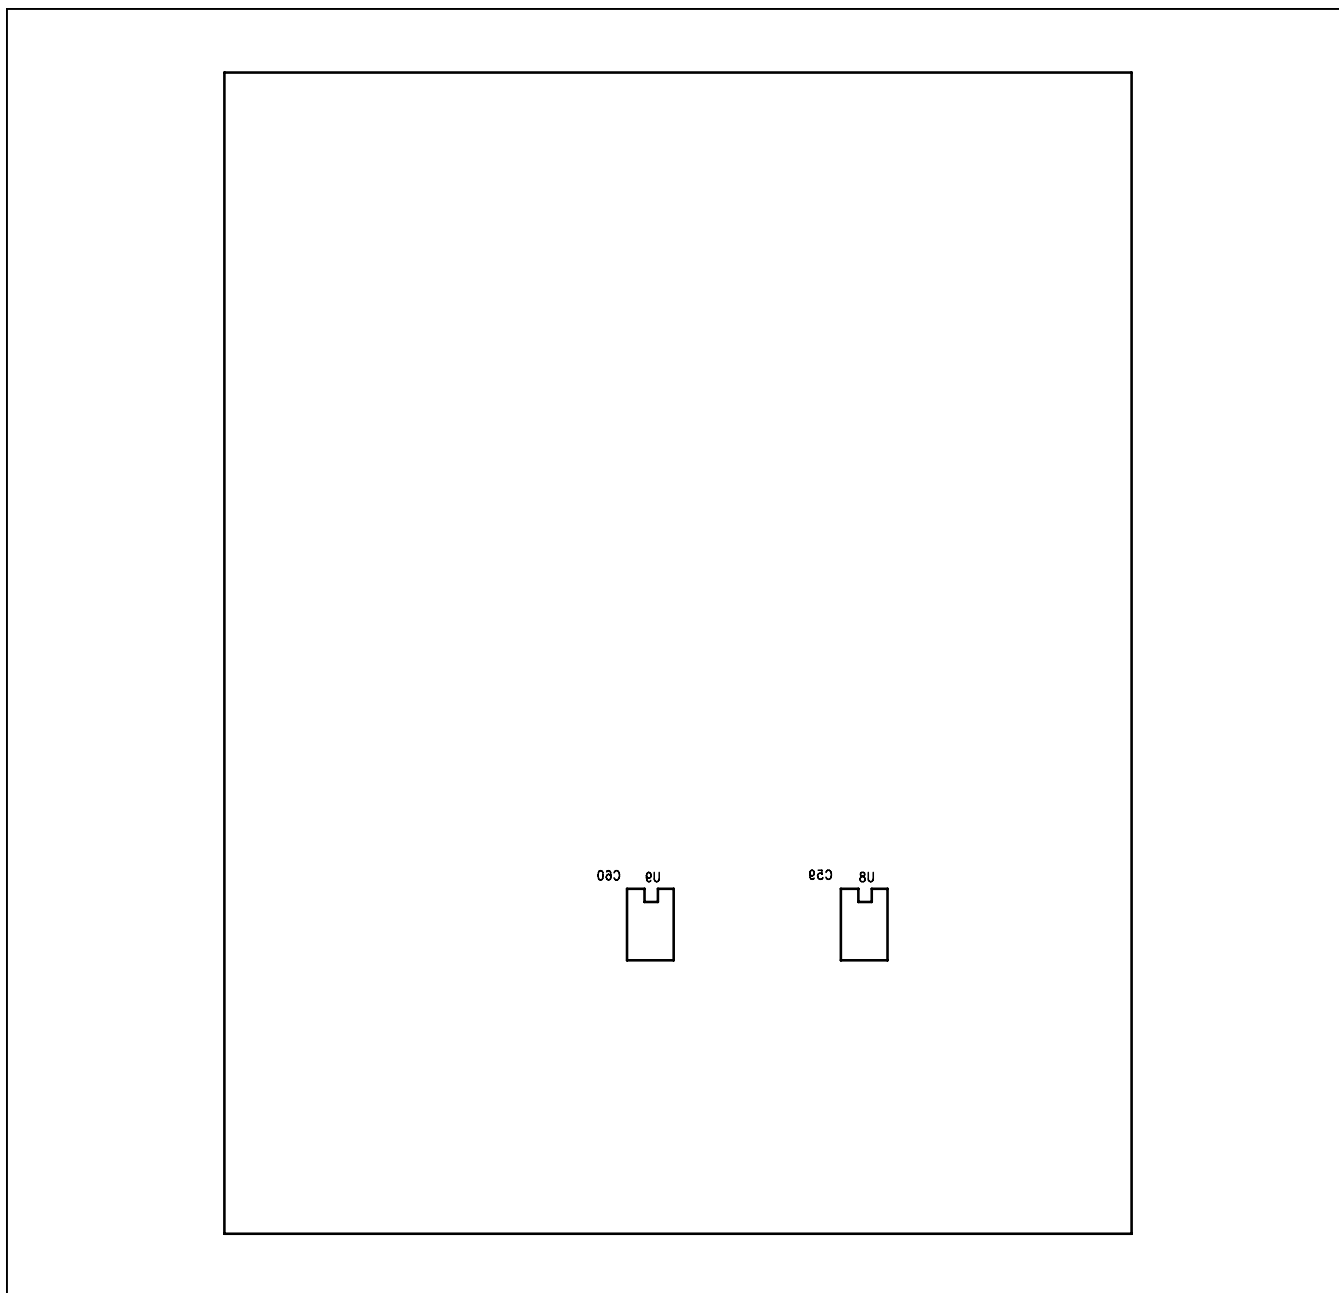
MAX2831 EV Kit PCB Layout—Bottom Silkscreen
